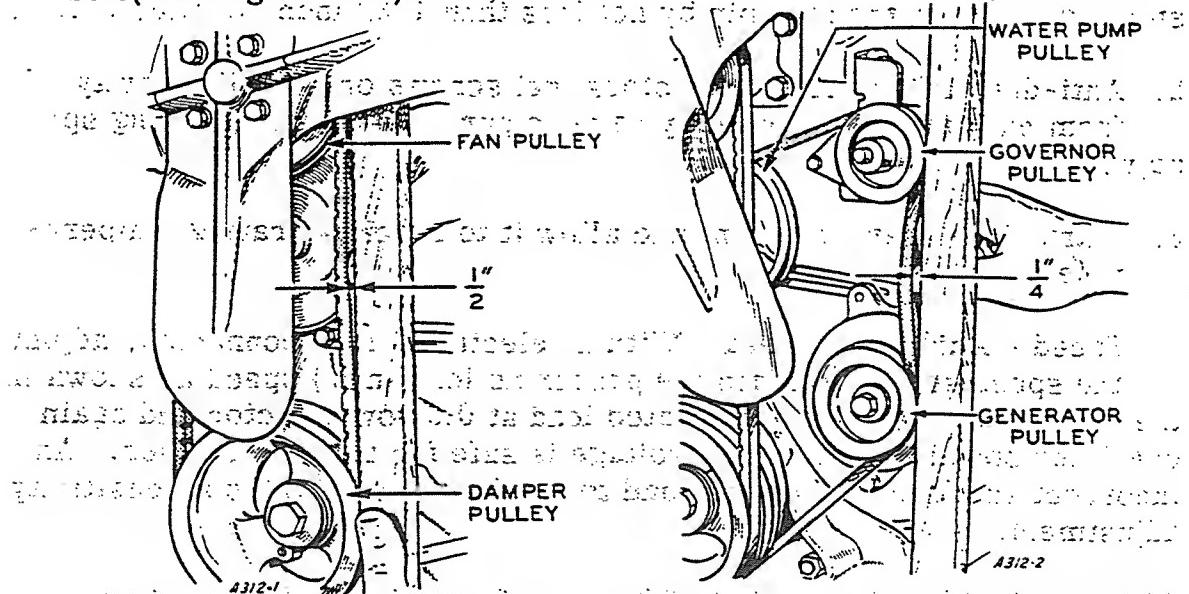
FAN AND GENERATOR BELT ADJUSTMENTS
